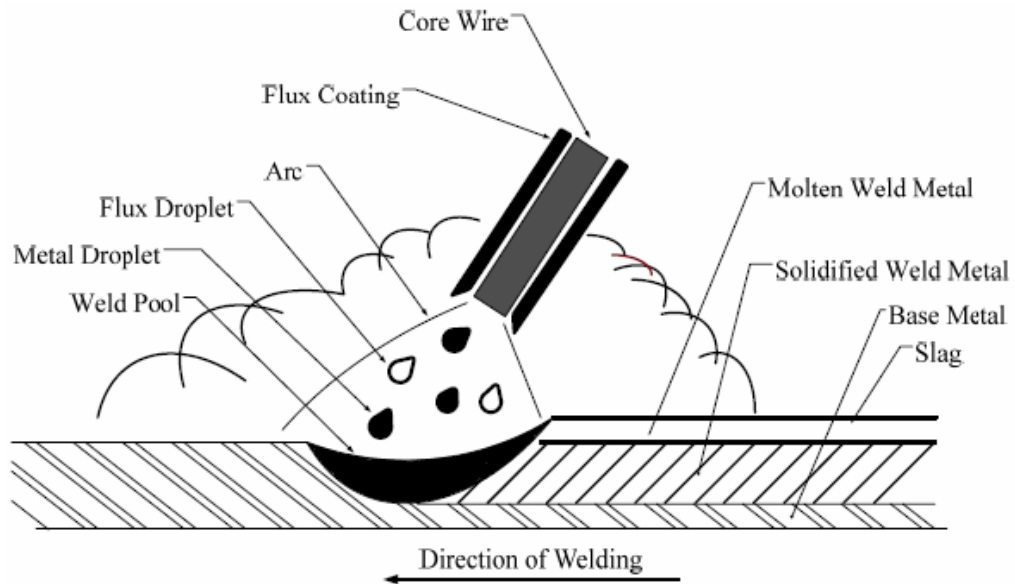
Shielded Metal Arc Welding (SMAW) Process [Lee 2006]
